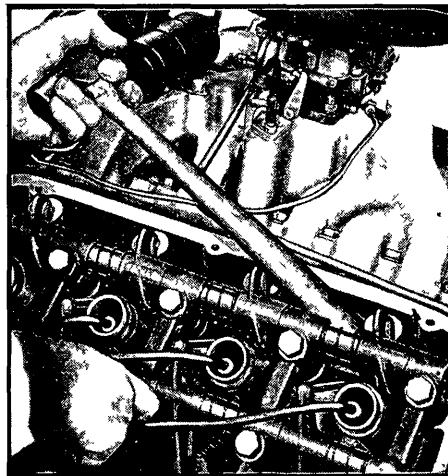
Chrysler and De Soto V8, 1951-52. Applying pressure against side of valve spring to determine if noise is caused by worn valve guides or cocked valve springs
